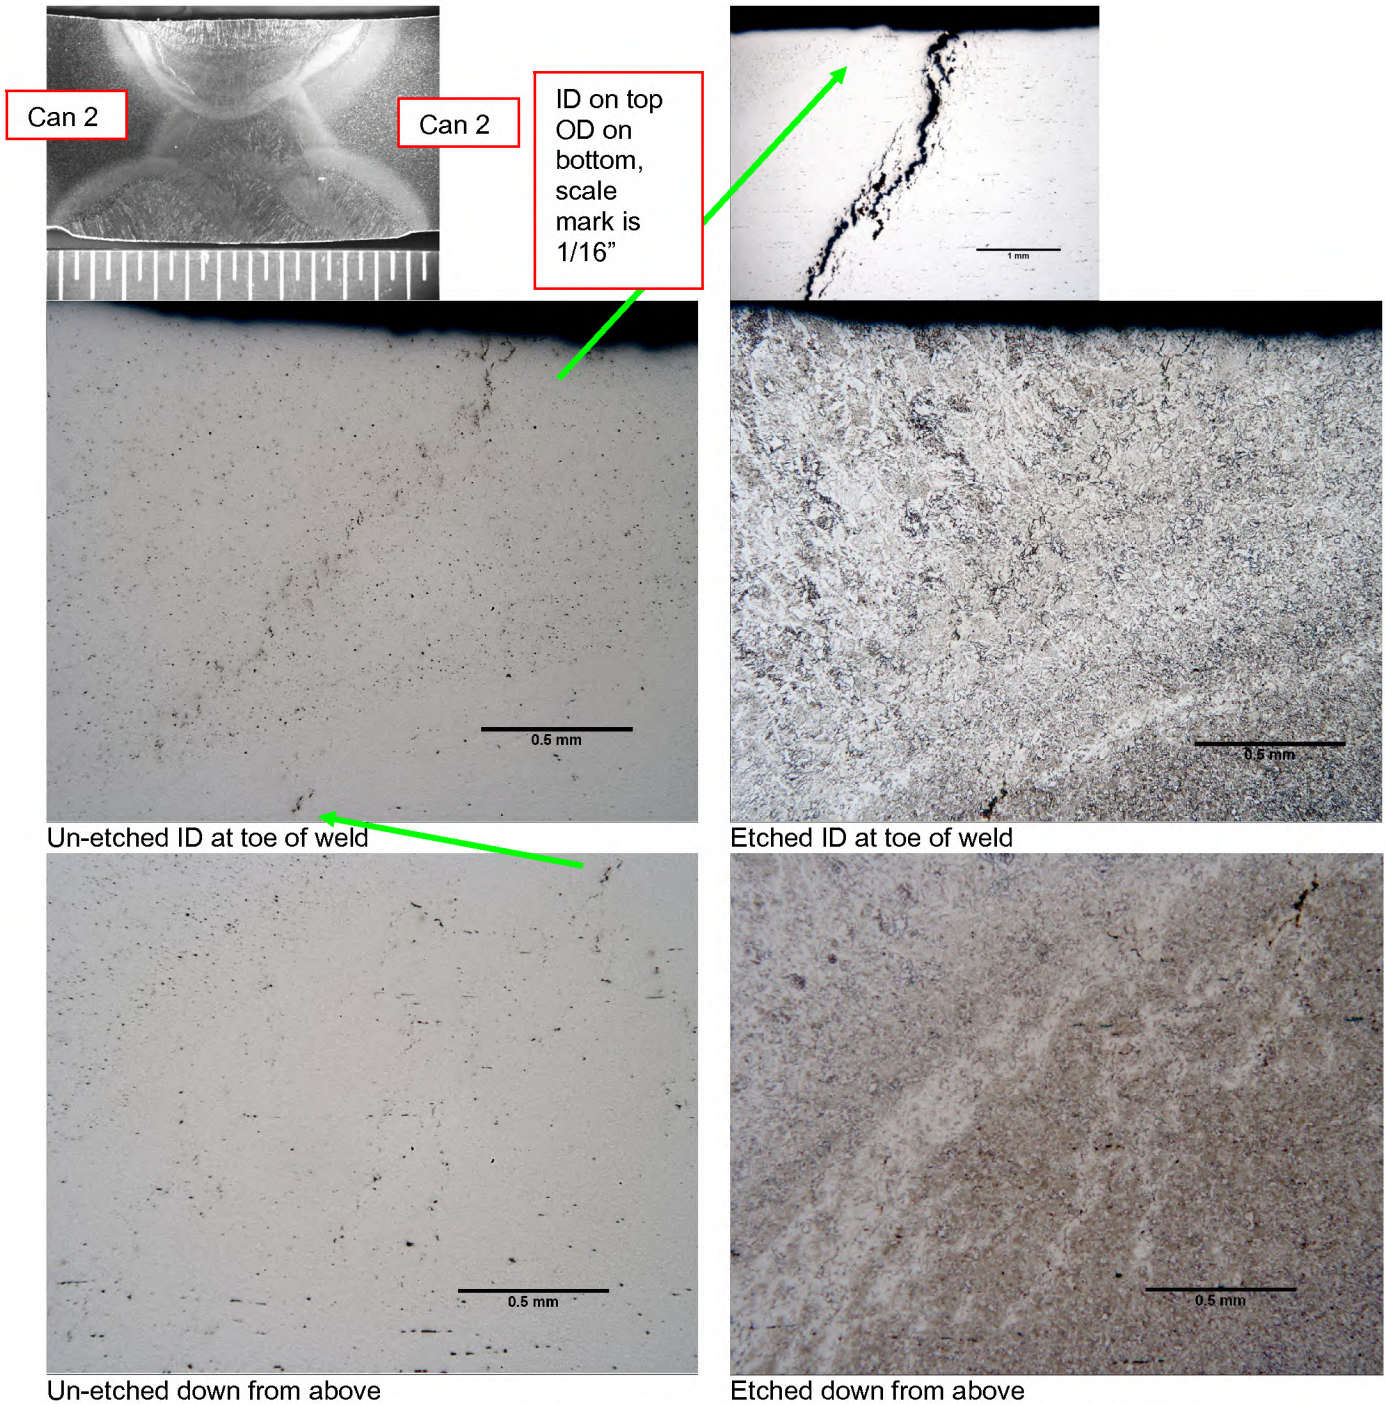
Photomicrographs of Mount T2L at right side Weld Metal side of crack
